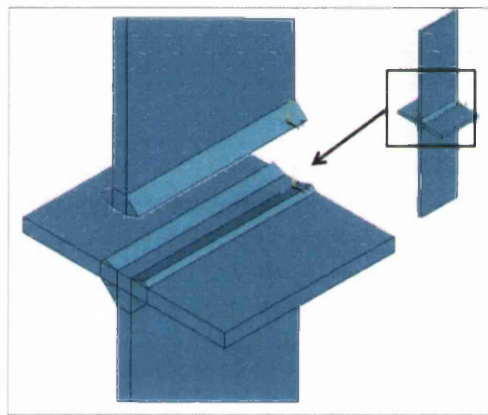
Load-bearing cruciform coupon - FE solid element model crack plane 10mm weld leg
